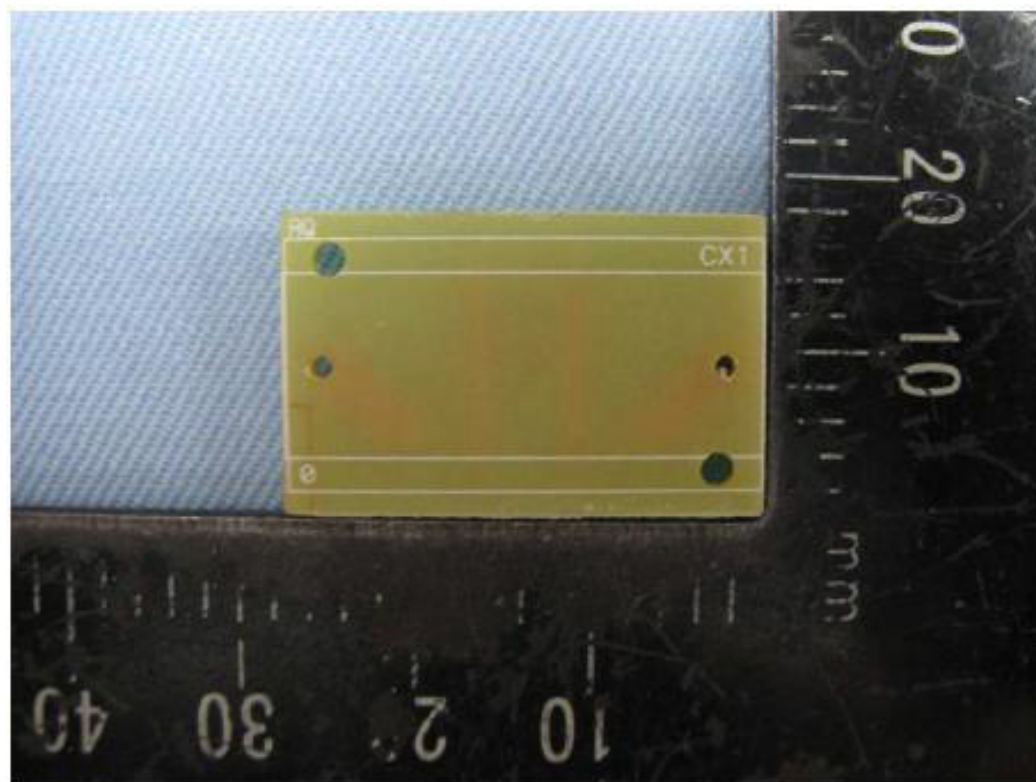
PCB type DC-4975 (GPS-1000DB XX)
